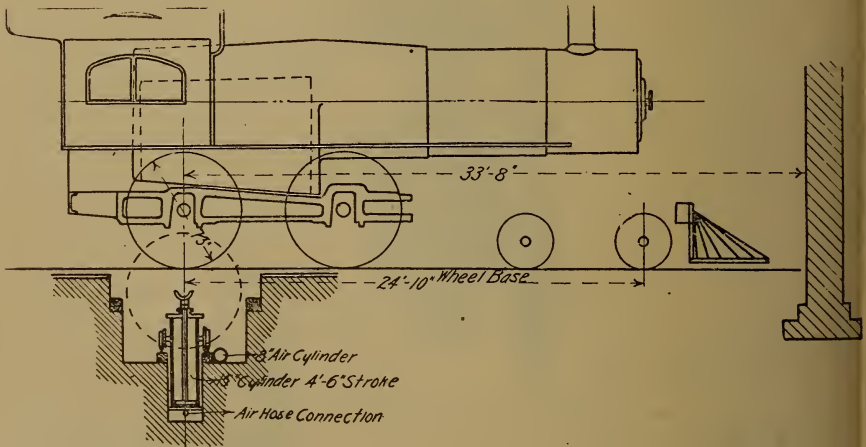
NEW DROP PIT AT BLOOMINGTON, C. & A. RY.
